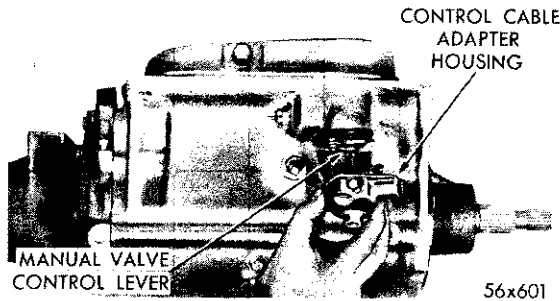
Removal and Installation of Control Cable Adapter Housing
